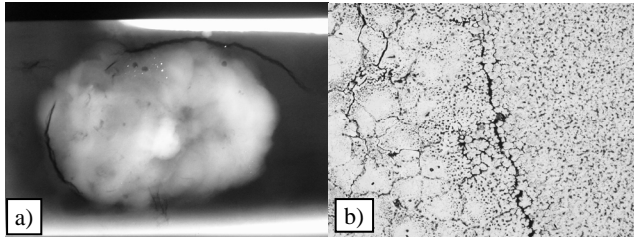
Examples of hot cracks in the heat affected zone (HAZ) in the repaired AZ91D alloy castings: a) X-ray photography, b) weld microstructure
